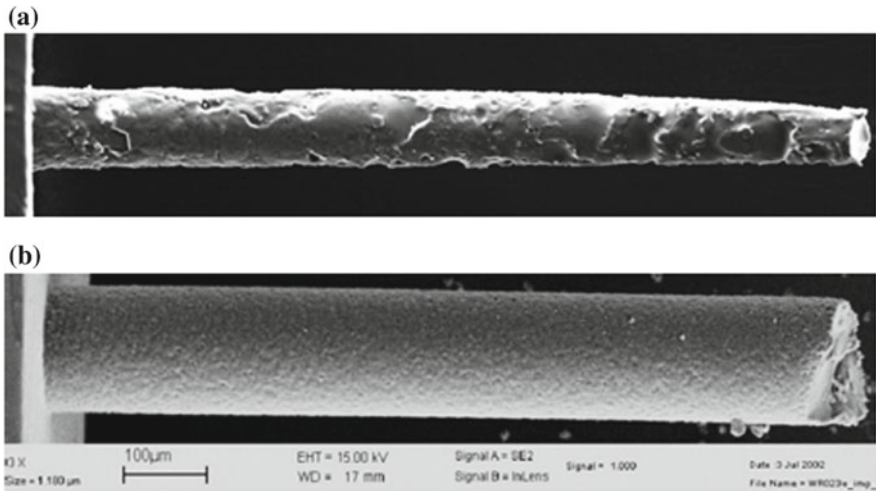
Cross-sectional image of a laser and laser-EDM hole after EDM drilling [20]
